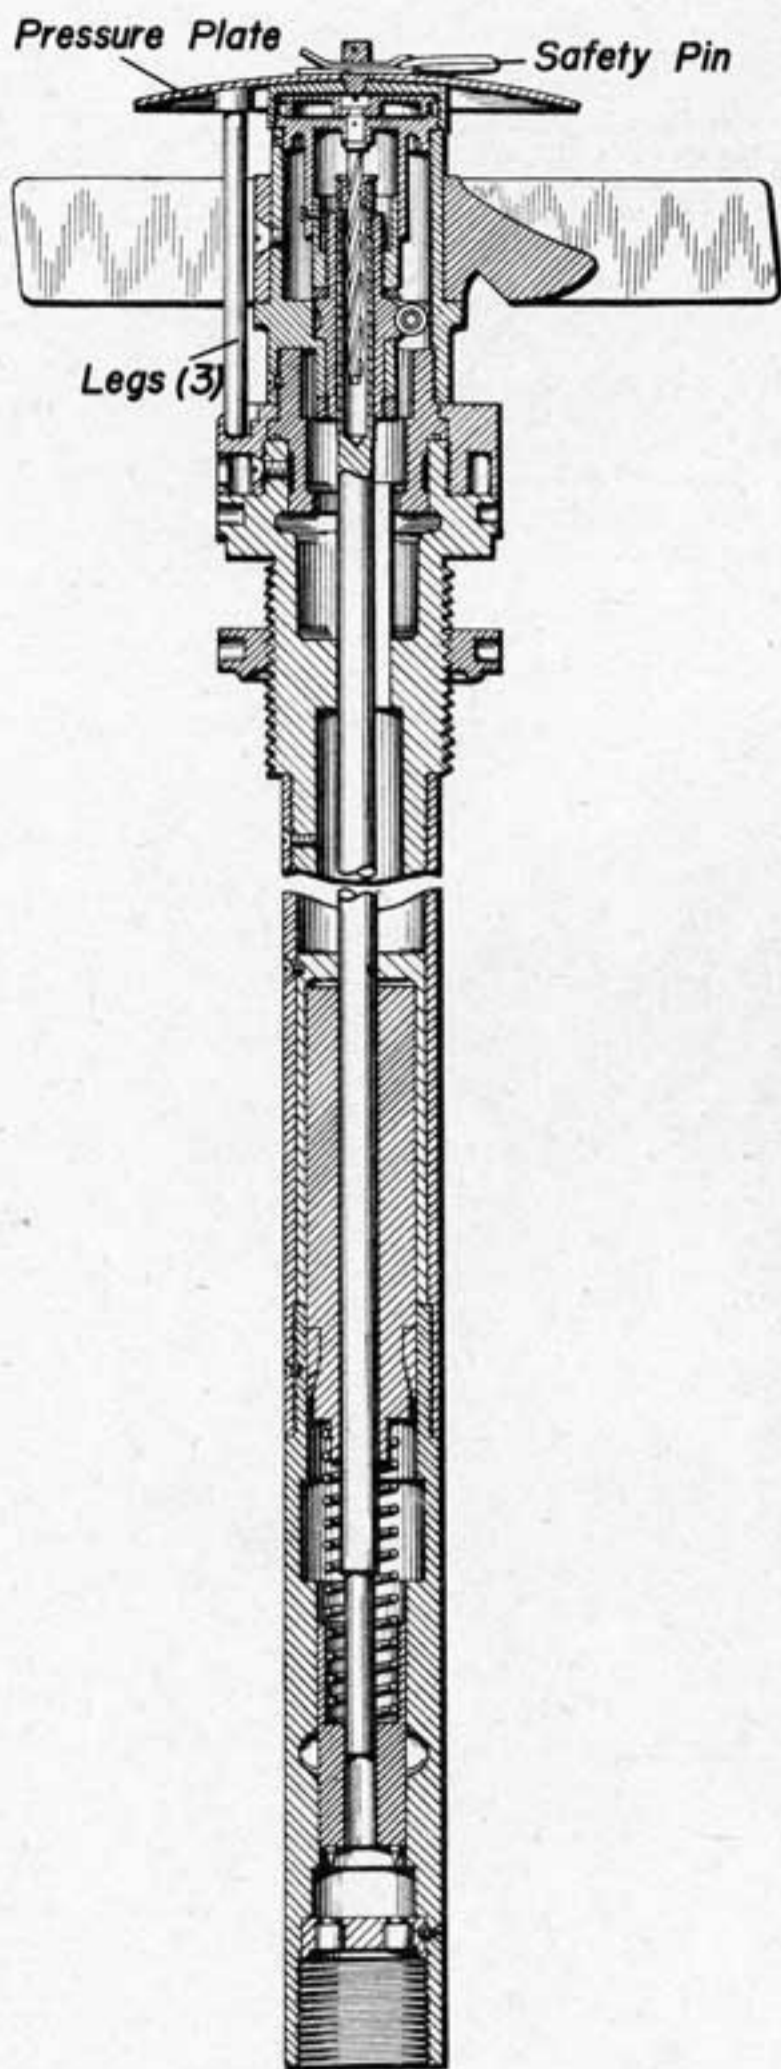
160/C.S. Depth Bomb, Tail Fuze, Unarmed Position, Sectional View
